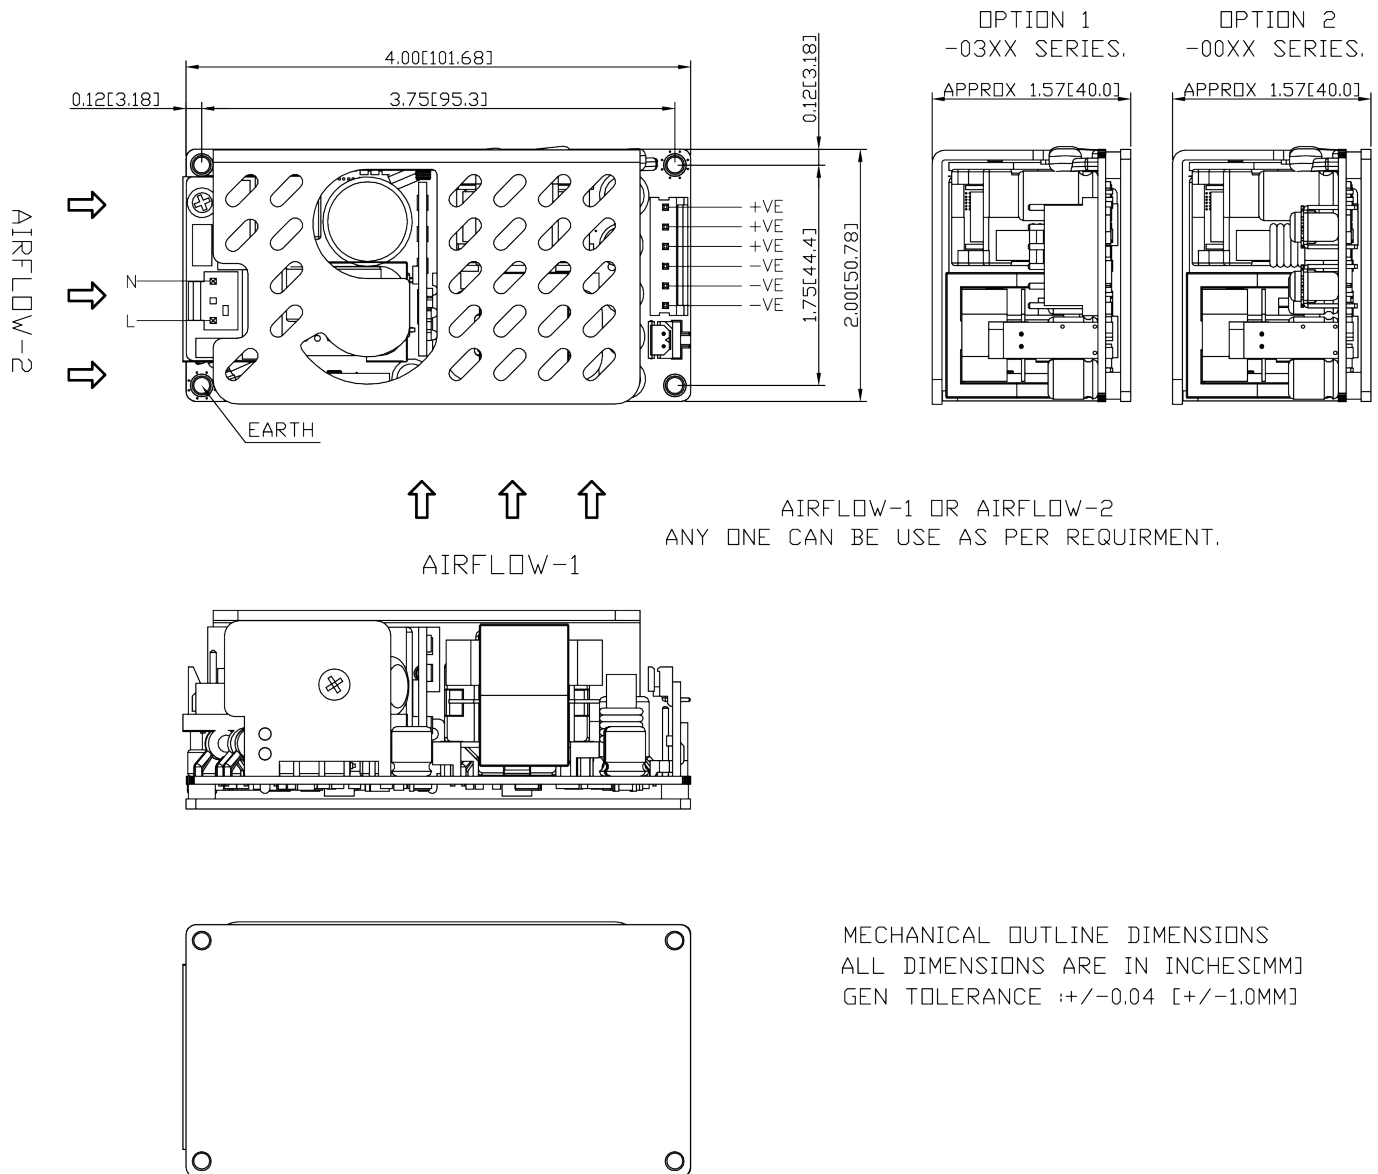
Mechanical Drawing – MEPG300-0XXX models
